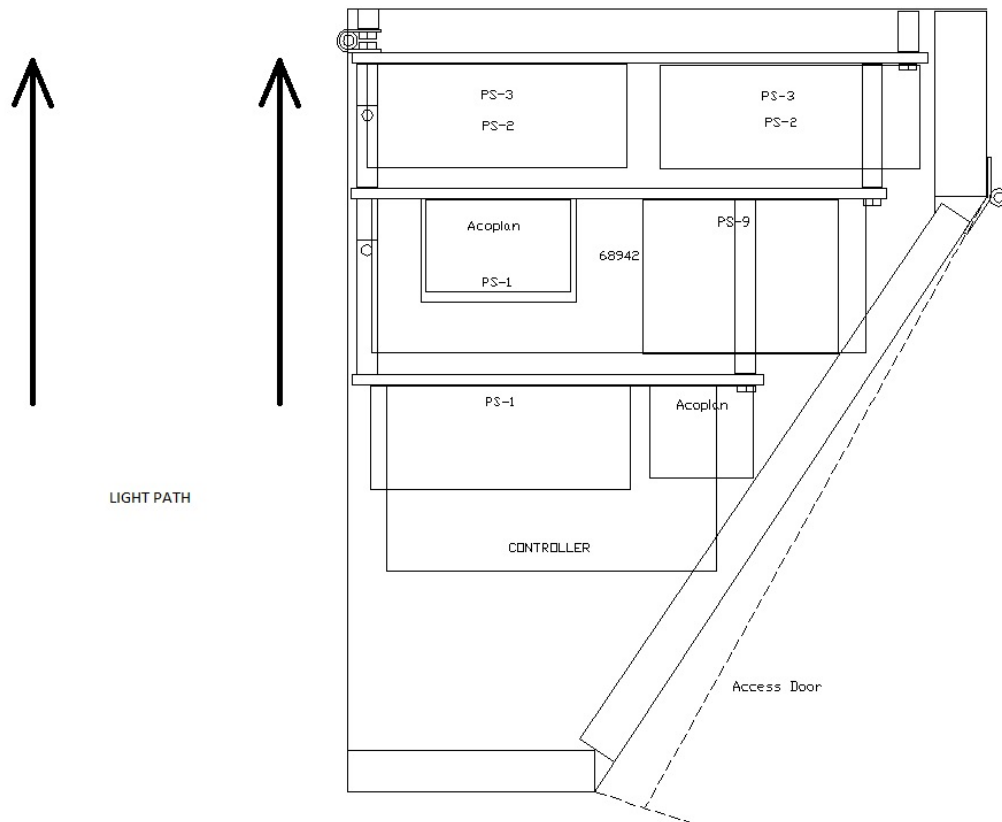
Mechanical Concept for Mounting Lamp Controller HW (Top View)
